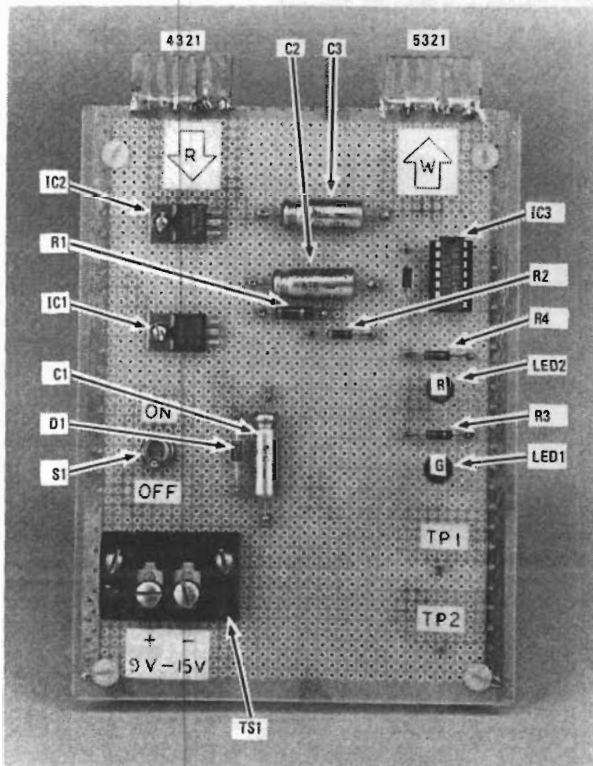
COMPONENT LAYOUT for point-to-point wiring of the interface board.
